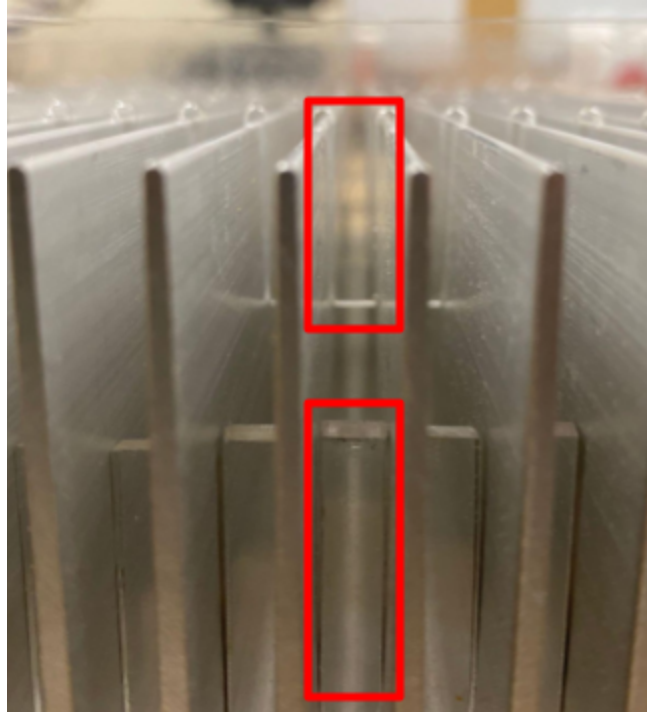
Overlooking view of first prototype design with upper hot heat sink removed.
